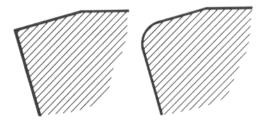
Basic shapes of cutting edge: Left - bevelled edge; Right - bevelled and chamfered edge
